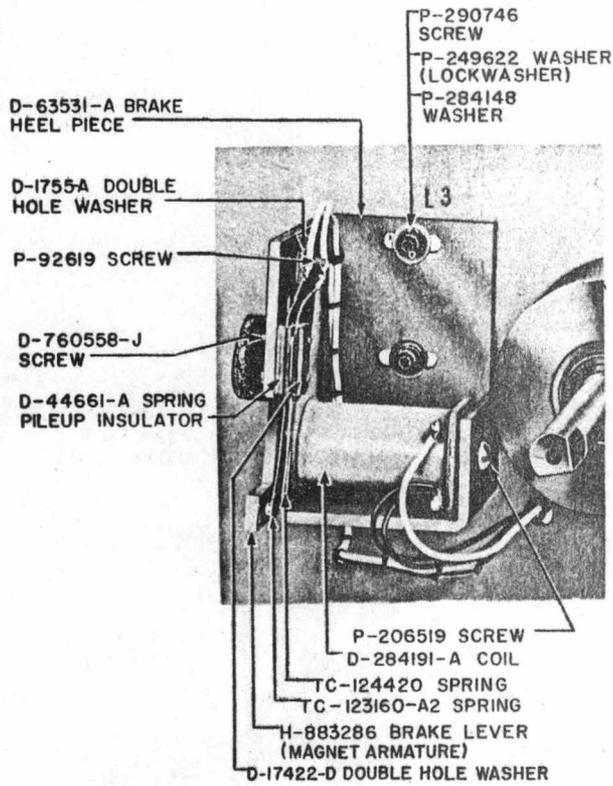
Drum Brake Release Magnet (Drum Removed)
